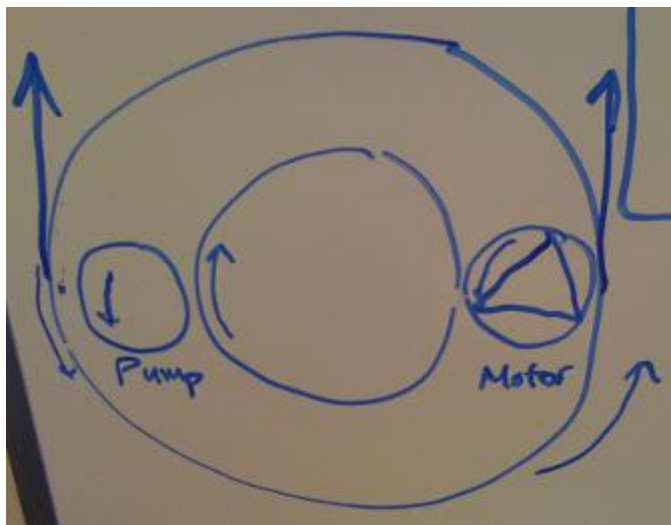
Power transfer concept 3, where the pump and motor gears are supported by the outer ring gear and sandwich an inner spur gear. This system leaves no area for a shaft to shaft clutch.
